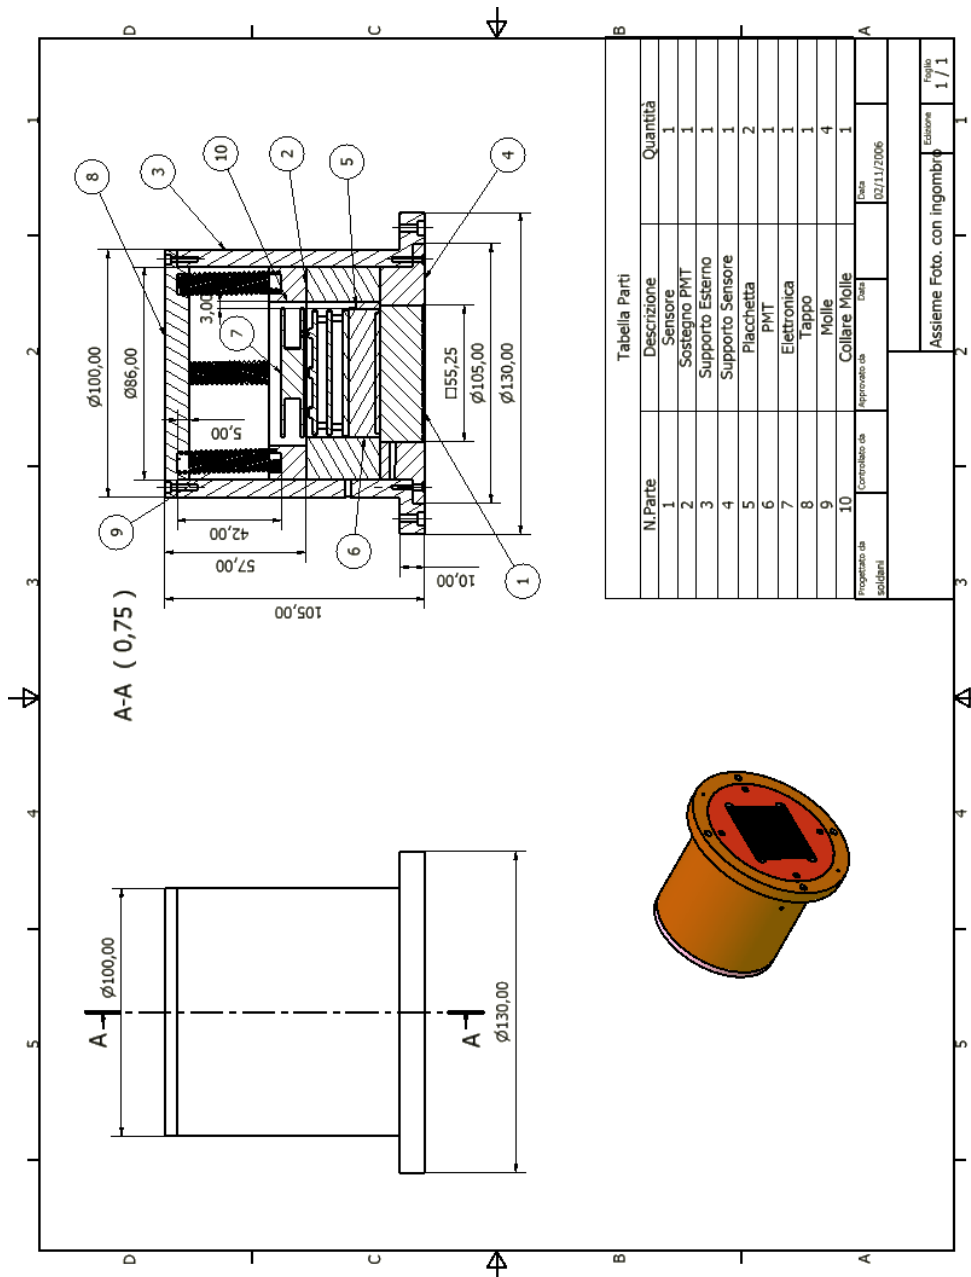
Mechanical design of one detector head. 1: scintillator crystal. 6: H8500 PMT. 7: front-end electronics boards.
